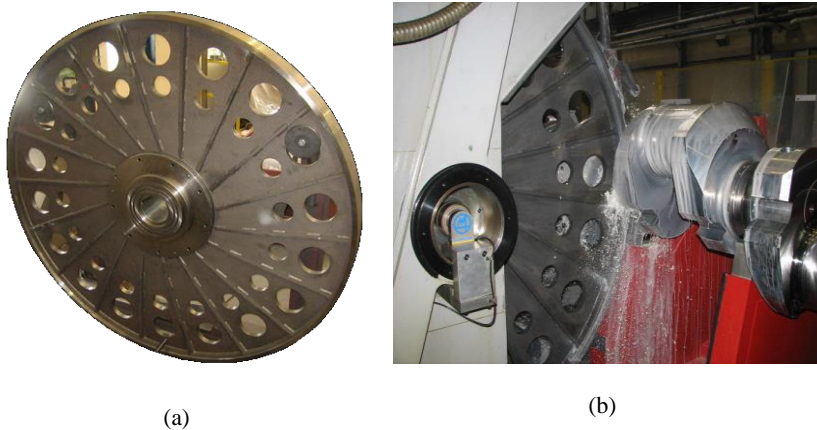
The grinding wheel MOLEMAB B126-100639 S.630090 type:
